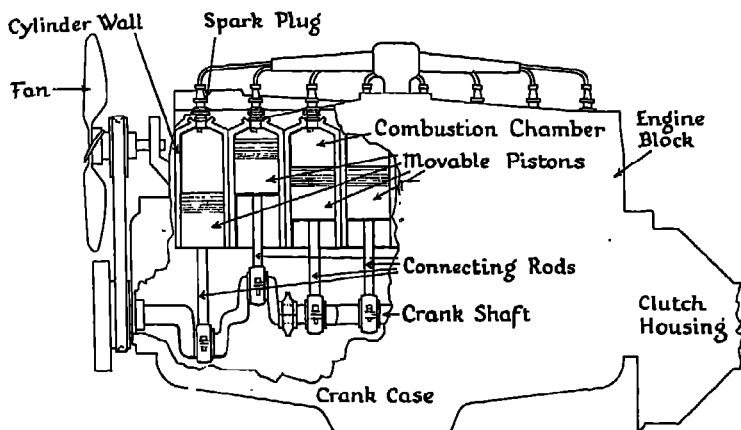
Inside the engine block are cylinders containing movable pistons. The upper parts of the cylinders are combustion chambers with spark plugs extending into them.
